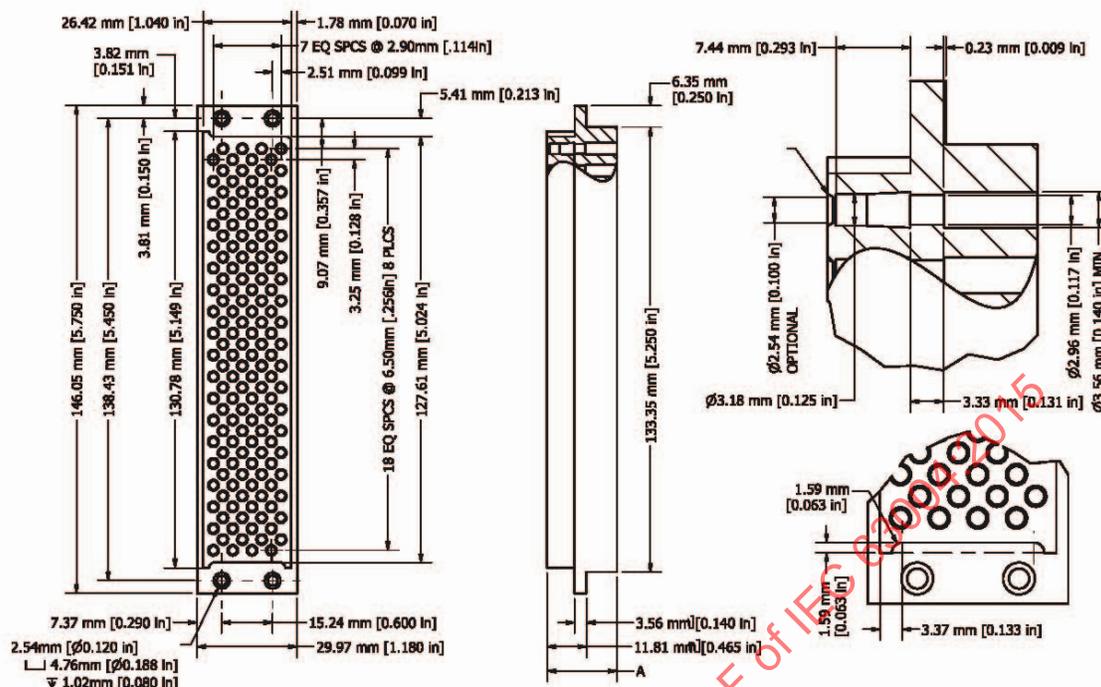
Coax module, 2 slot, 152 position for 5 GHz contact, receiver housing physical layout
